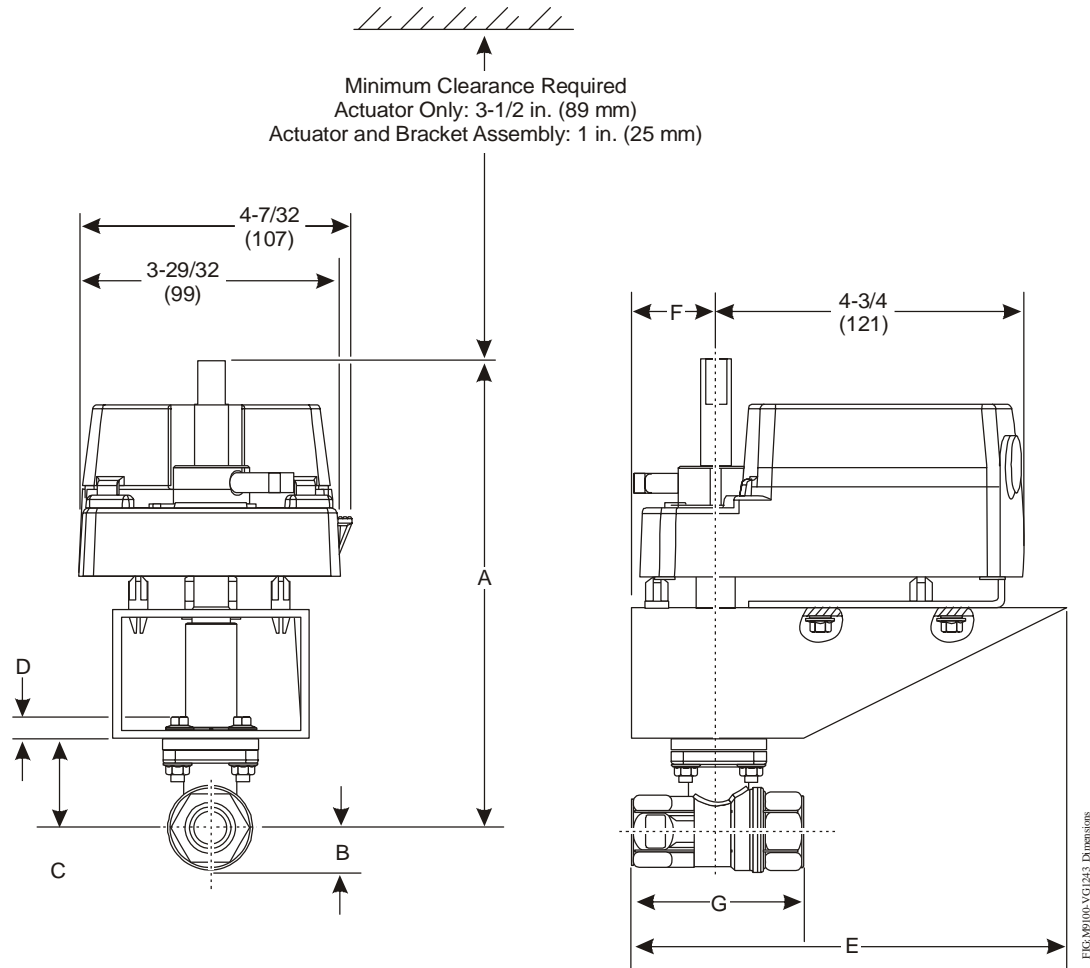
Actuated Ball Valve Dimensions, in. (mm)
